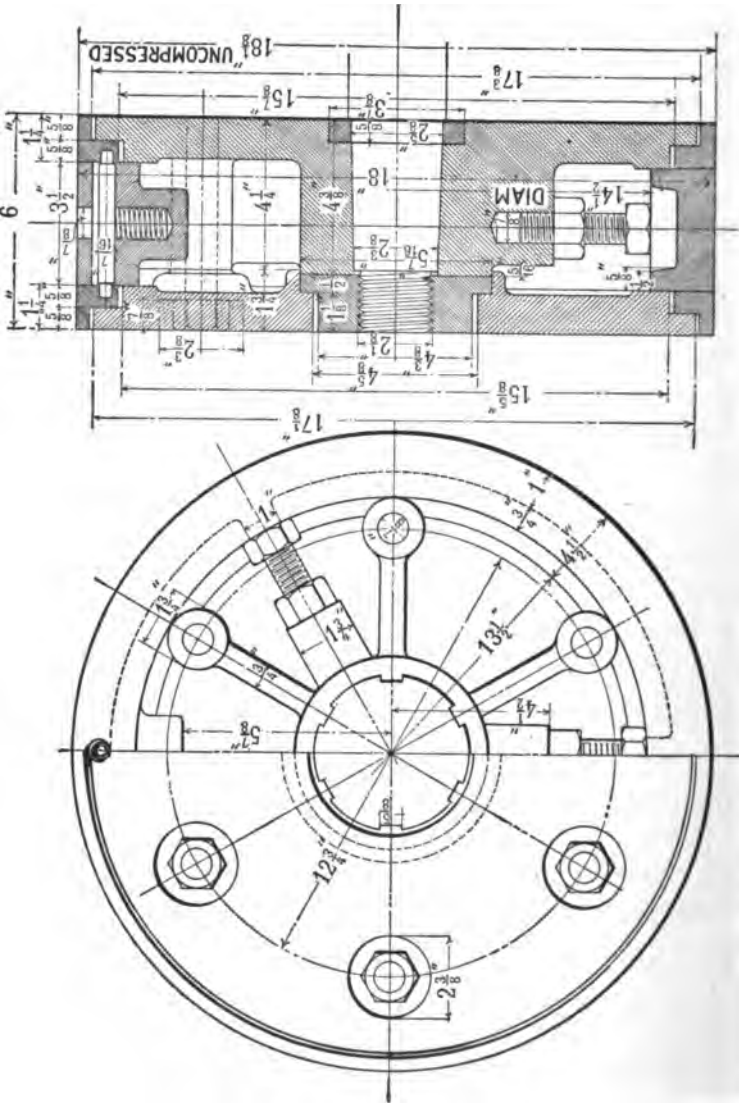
is a built-up piston for the Tangye stationary engines made by the Buckeye Engine Co. It consists of a spider, follower, and adjusting-screws. There are no springs; the screws act on an uncut junk-ring, so can only be used for centring, not for packing. The packing-rings are turned larger than the bore of the cylinder so as to pack by their own elasticity. They may or may not be turned eccentric, that is, thin where cut, and full thickness opposite the cut.
